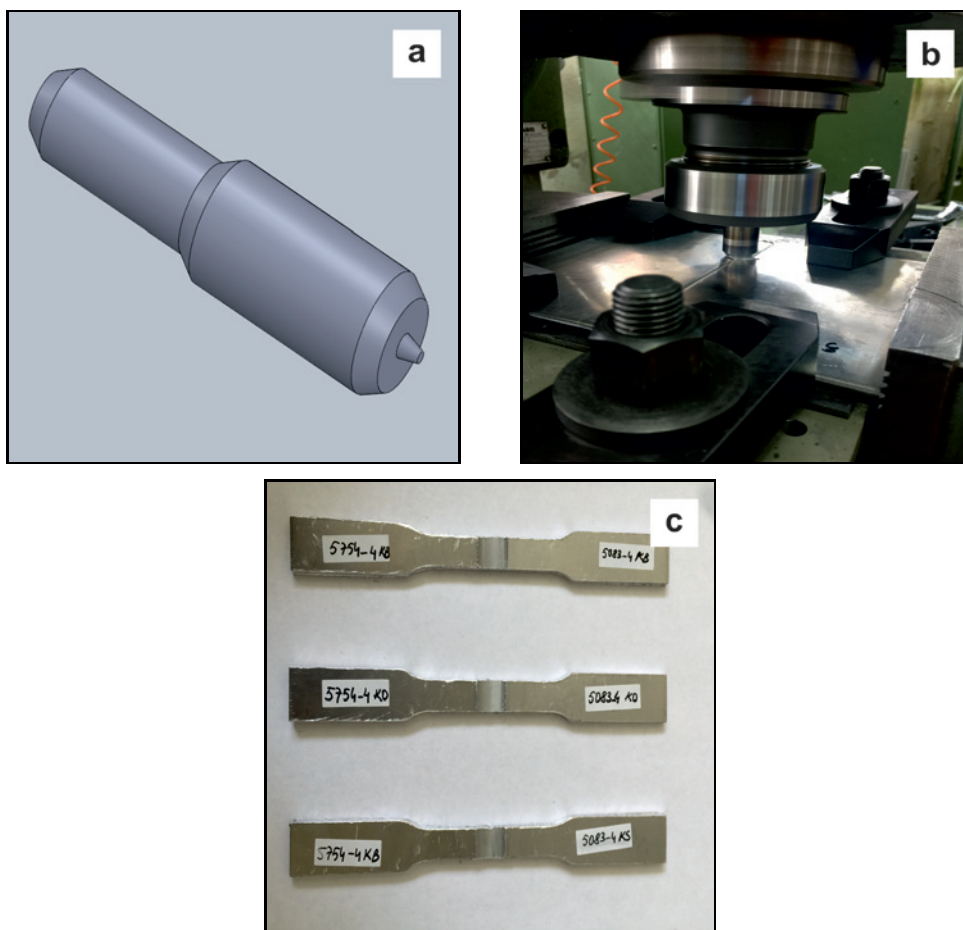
Images of (a) tapered pin tool, (b) FSW operation in the Universal Milling Machine, and (c) tensile test specimens.
